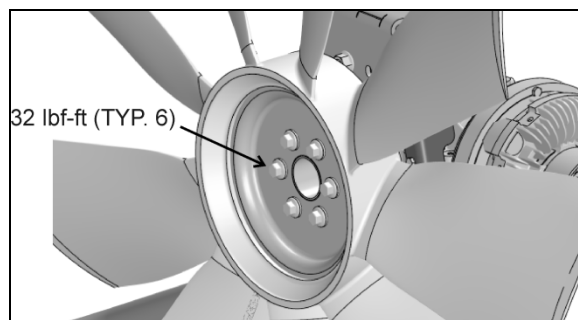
RADIATOR FAN MOUNTING BOLTS 05125
